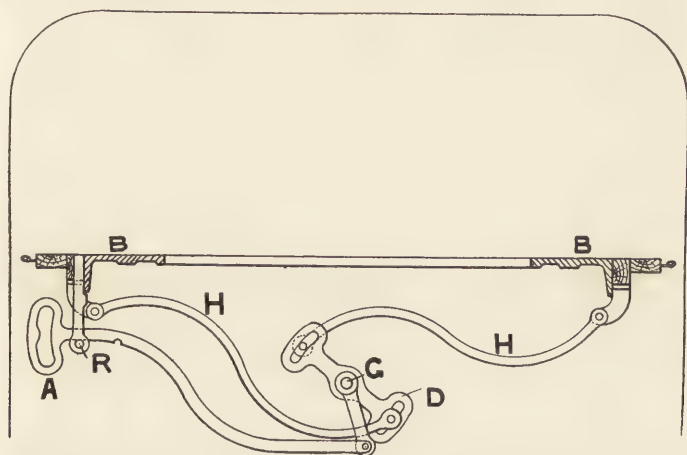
SECTION SHOWING THE ARRANGEMENT FOR LIFTING THE THREAD BOARDS ON BOTH SIDES OF THE RING FRAME SIMULTANEOUSLY.
